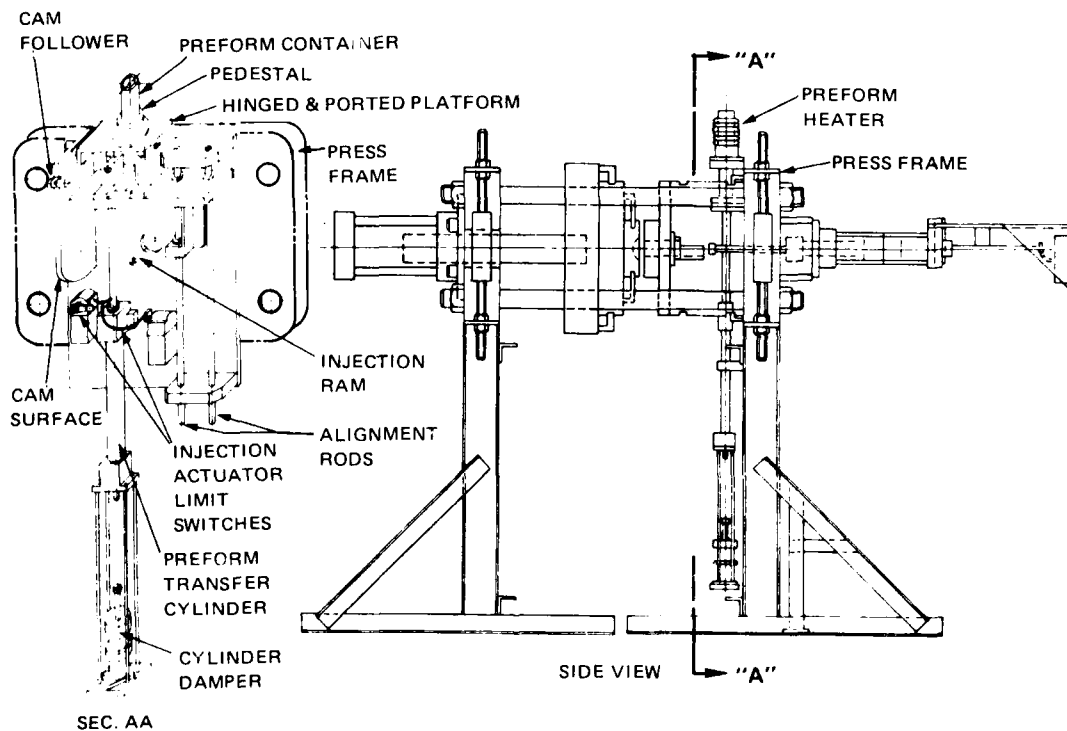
Schematic of Automatic Transfer System for Use With The Machine Casting Unit
